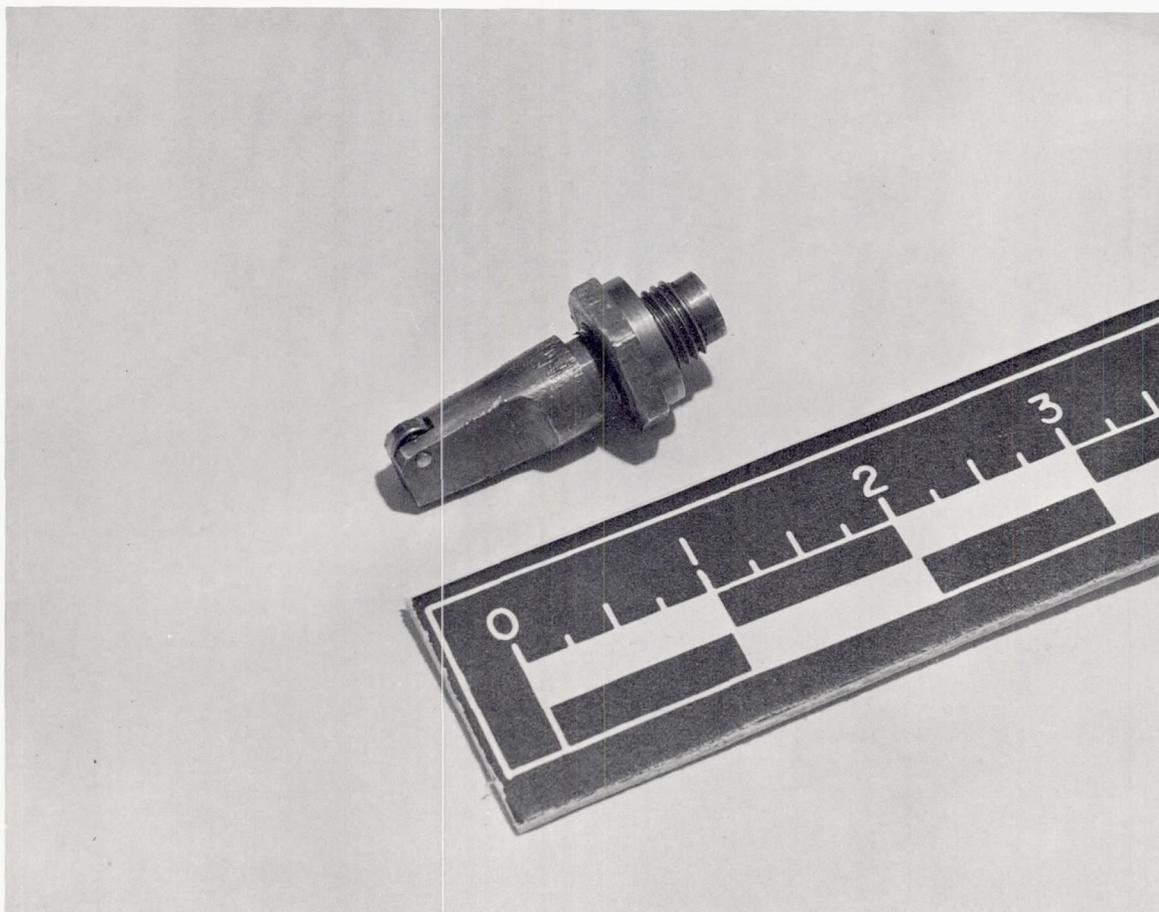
Guide tip for feeding wire when welding with the metal-inert-gas process. Note the ball bearing in the tip.
